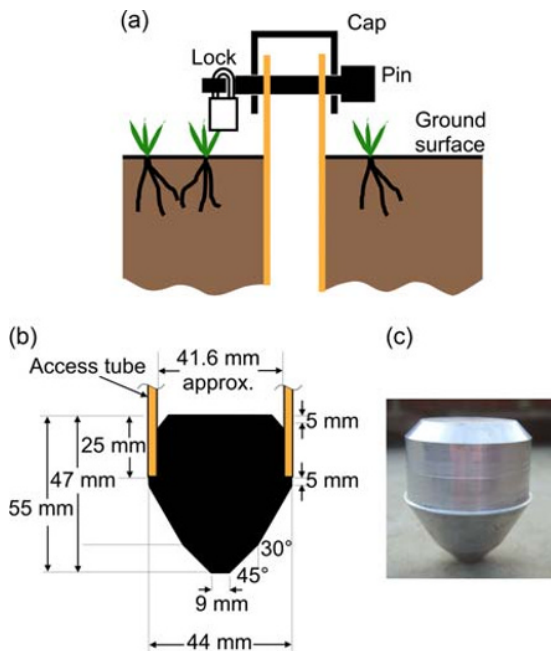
(a) Locking cap for access tube security. (b) and (c) End plug. The plug should fit snugly inside the tube, and its outer diameter must be no larger than that of the access tube. It must be sealed onto the tube to keep water out.
